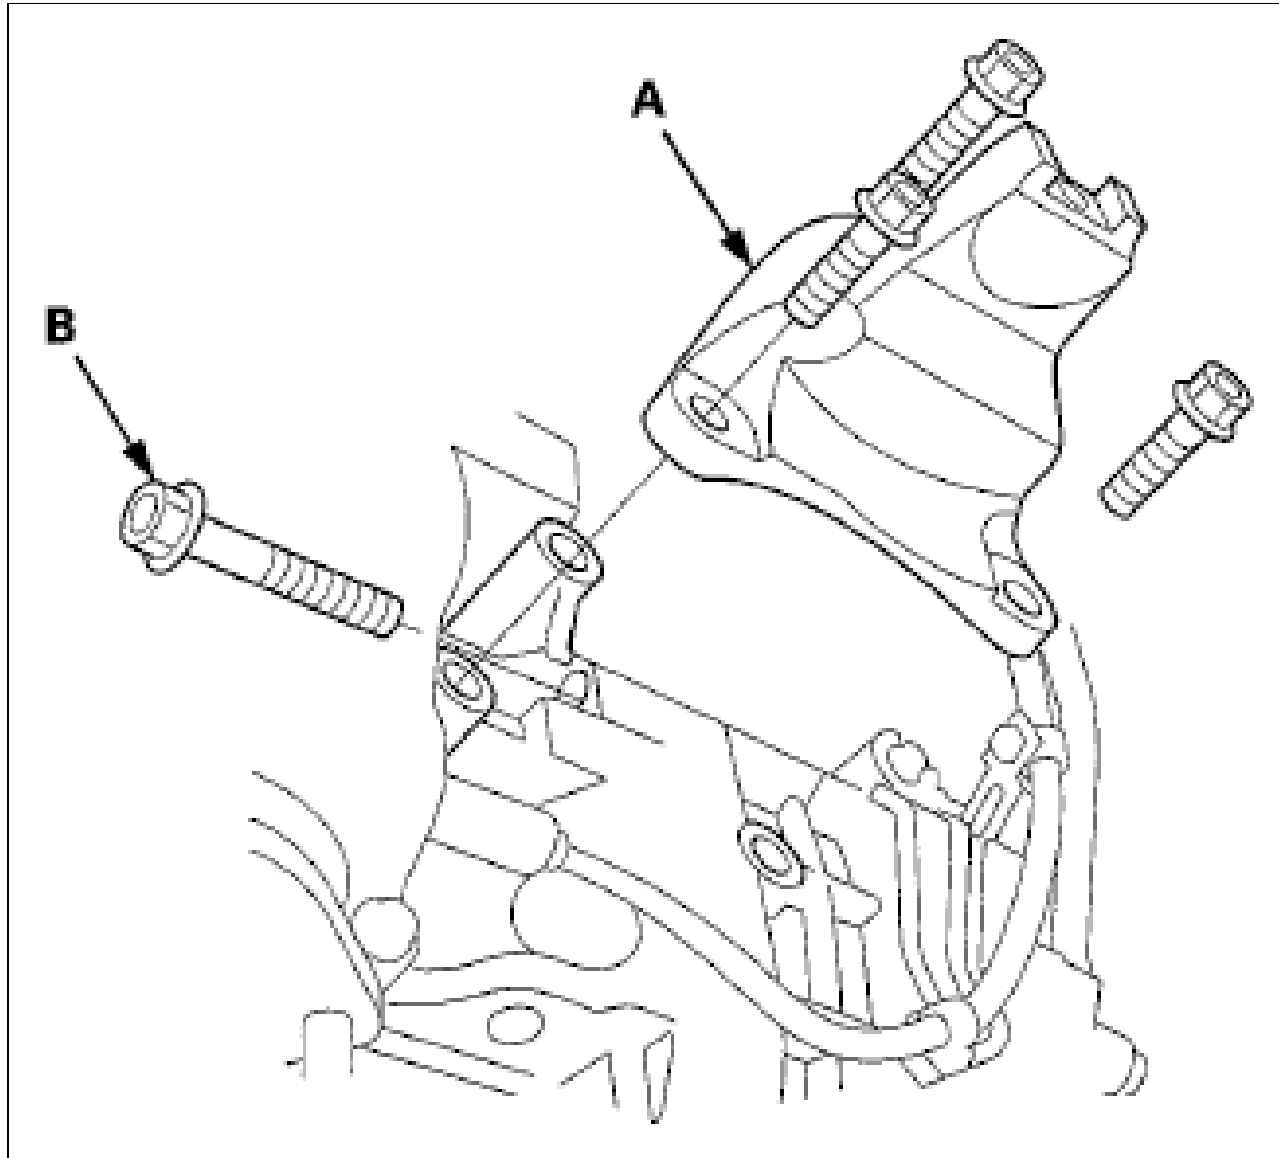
Identifying Lower Transmission Housing Mounting Bolts
